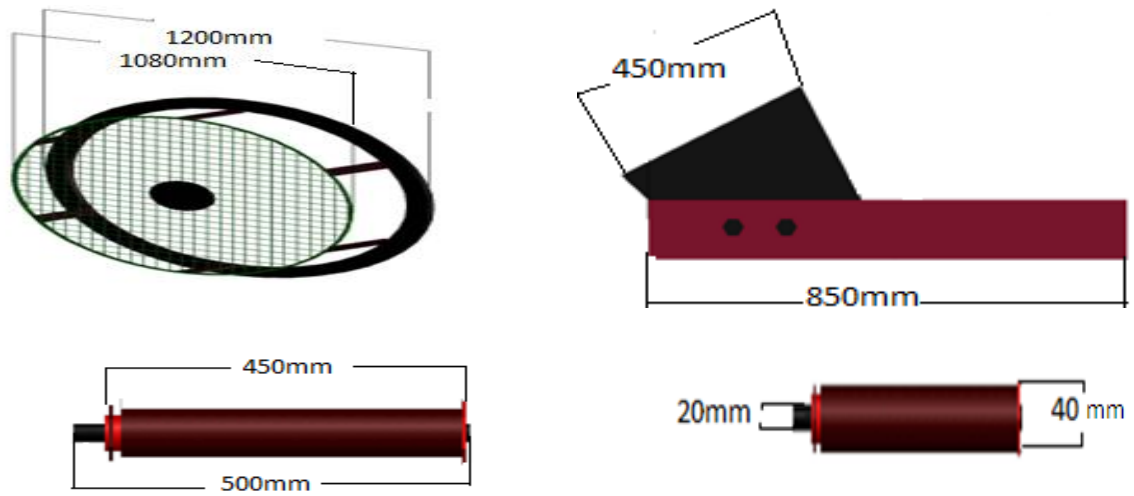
Isometric view of various parts - (a) Flywheel cover, (b) Feeding chute, (c) Handle
